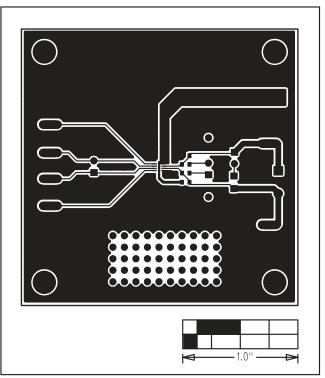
MAX13485E EV Kit PCB Layout—Component Side
